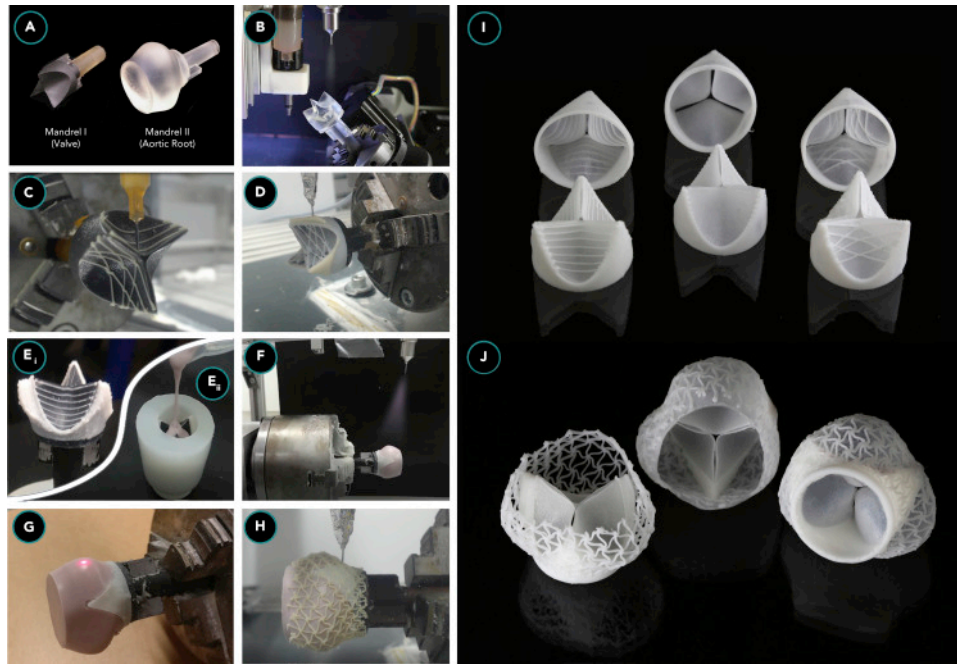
Multi-material additive manufacturing process used for the fabrication of customised silicone heart valves: (a) mandrel supports of aortic root; (b) valve-shaped mandrel; (c-e) customised inter-leaflets; (f) valve with soft silicone membrane; (g) auxetic valve outer surface; (j) complete silicone replacement valve [87]
